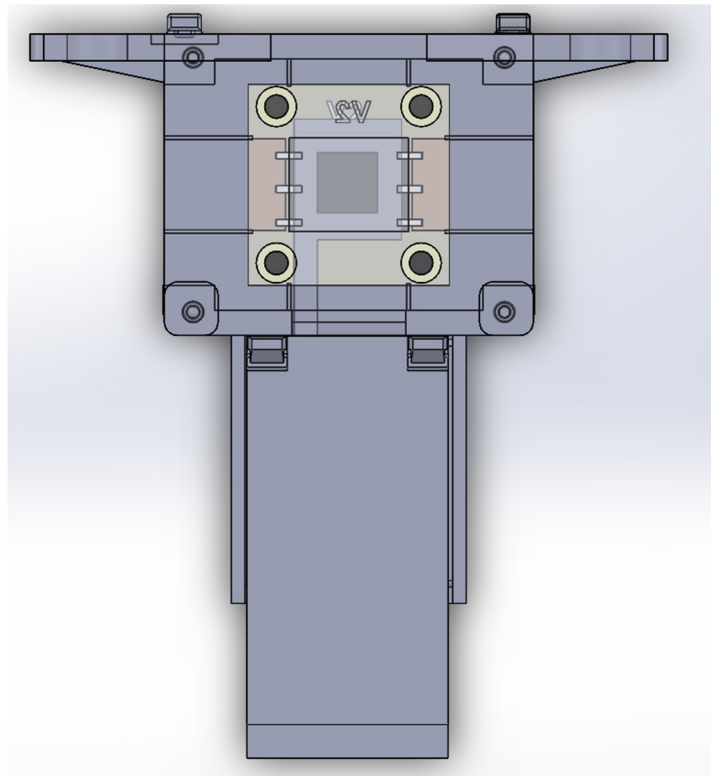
A 3D model of the 3D-printed testing box design (top view).
